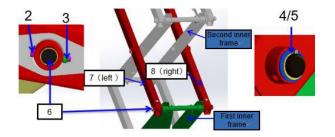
Installation of second layer fork2. Bolt 3. nut 4. washer 5. retaining ring 6. pin7. Left weldment of outer arm 8. Right
